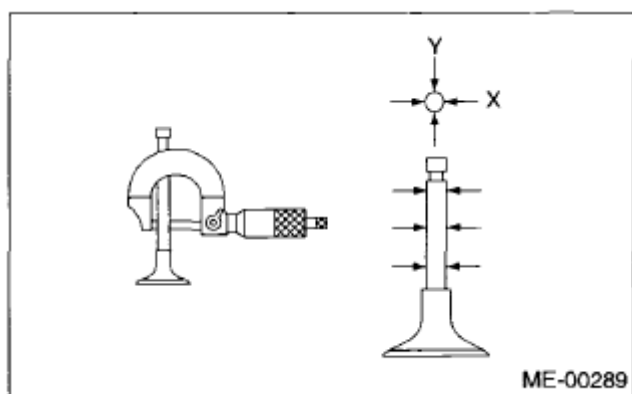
Measuring Outer Diameter Of Valve Stem With Micrometer
